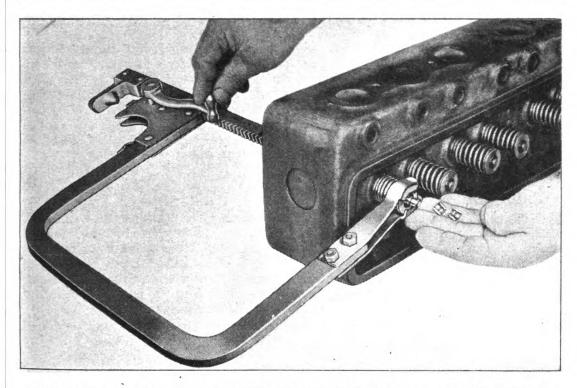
Removing Valve Retainers Using Owatonna Tool Company's Valve Lifter No. A200. Other Standard Tools will do as well.
